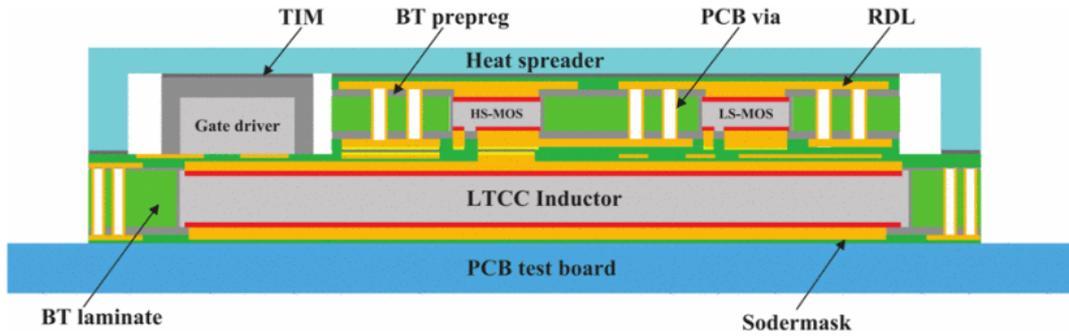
A chip-on-inductor packaging technique with dual sided cooling [33].
